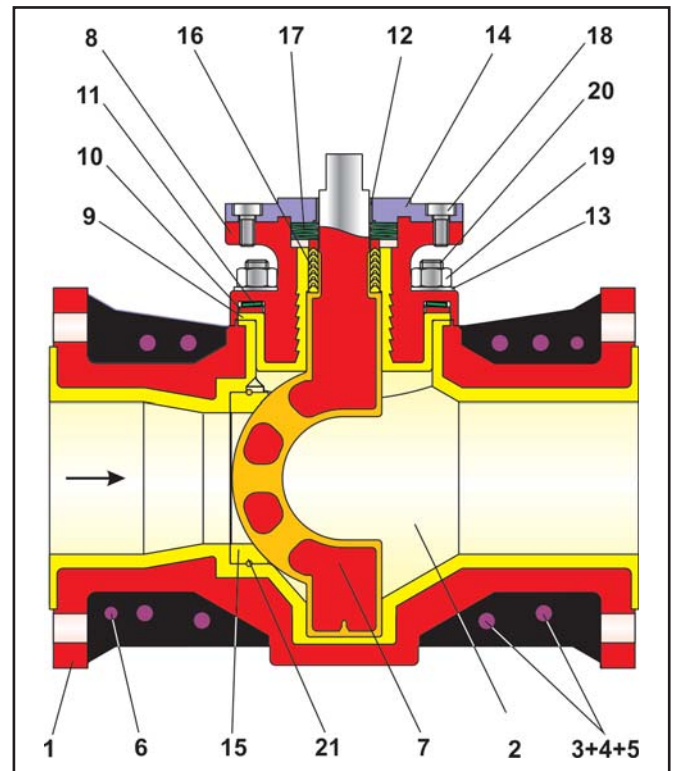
Sectional diagram of Series 23e Rotary Plug Valves => see Table 1 for list of parts
